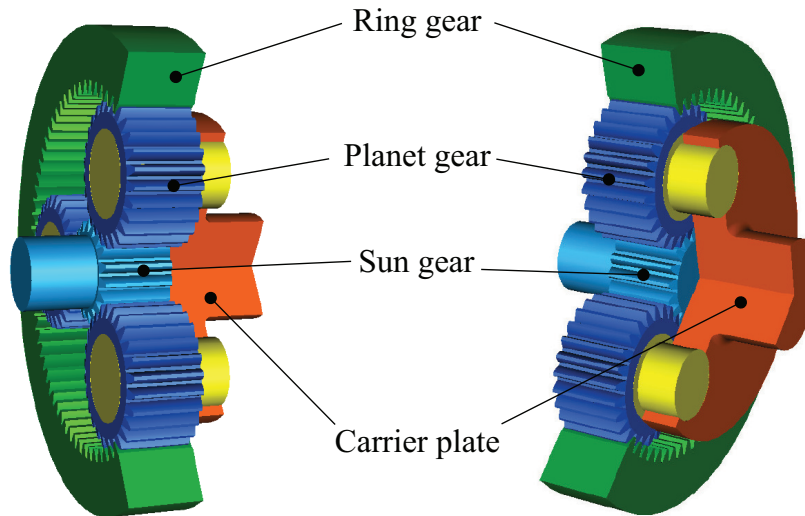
Illustration of a single-stage epicyclic gearbox.
